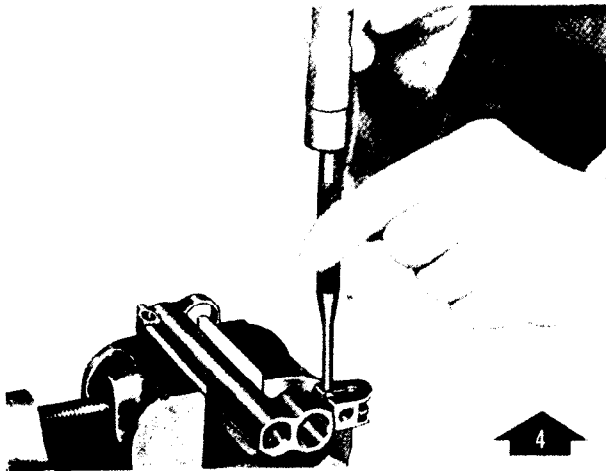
Disassembly/assembly of gas cylinder group. (1 of 2)
